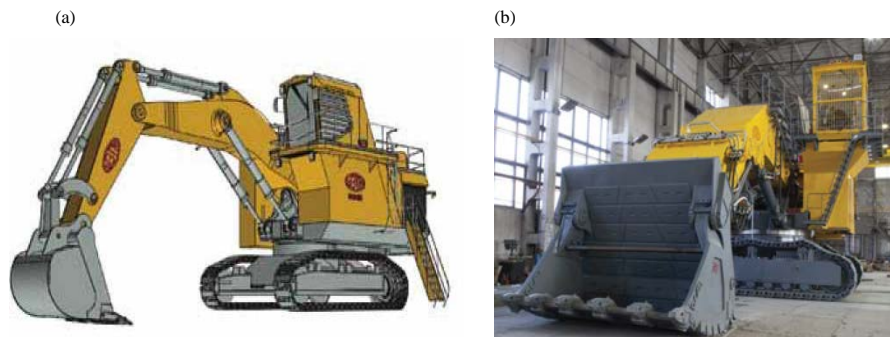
Project of UGE-300, Russian hydraulic excavator: a) UGE-300 with backhoe shovel and b) UGE-300 prototype with front shovel
